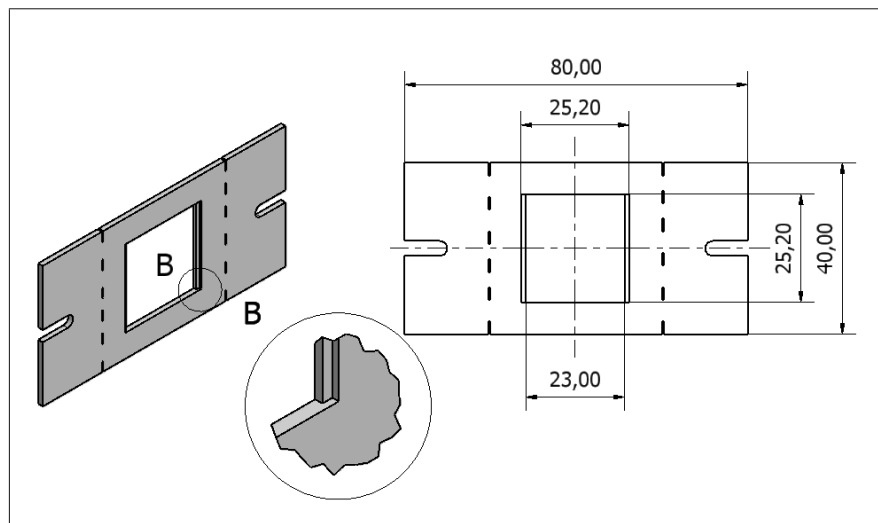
Mask 2. Used to deposit CuPc between the silver strips made with Mask 1. Dimensioned that a 23 mm × 25 mm area of CuPc could be deposited
